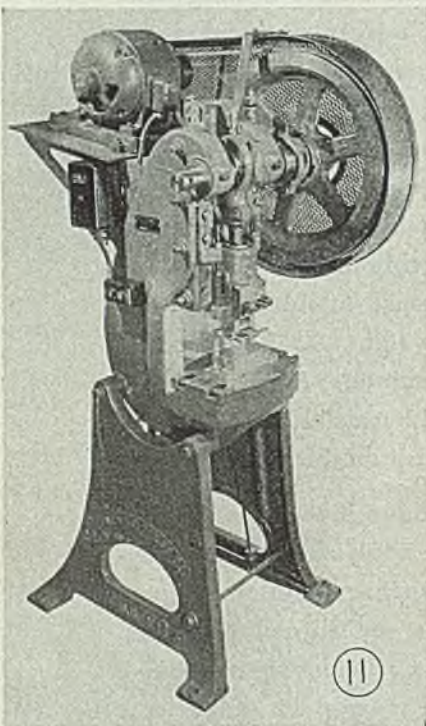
Motor-driven V & O press fitted with Force Model 23 stamping head with automatic trip and impression anvil. Unit is designed for indenting serial numbers on license tags
